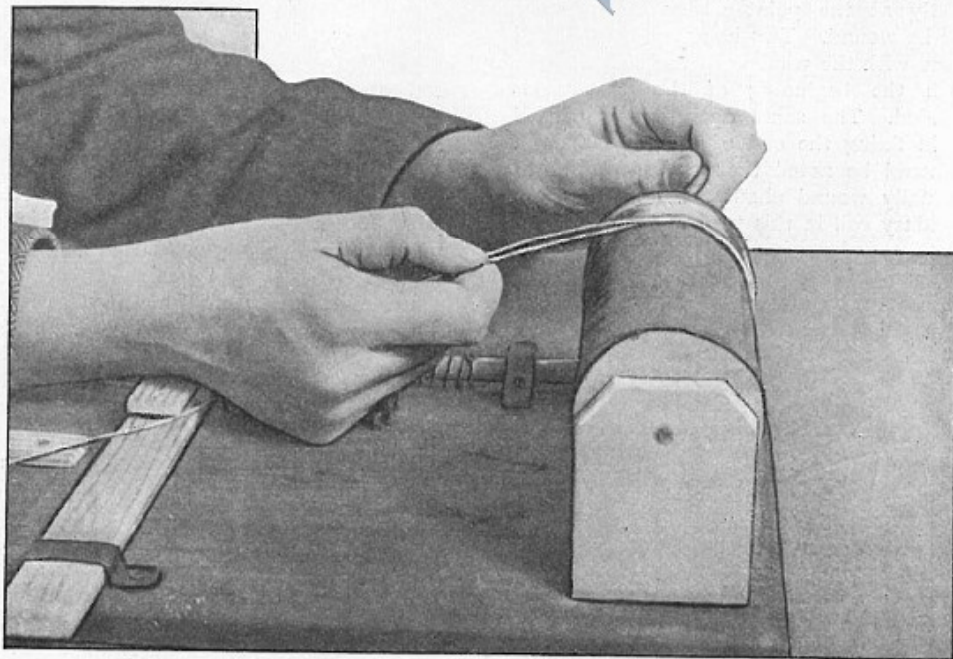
Method recommended for correctly space-winding a cylindrical coil.
